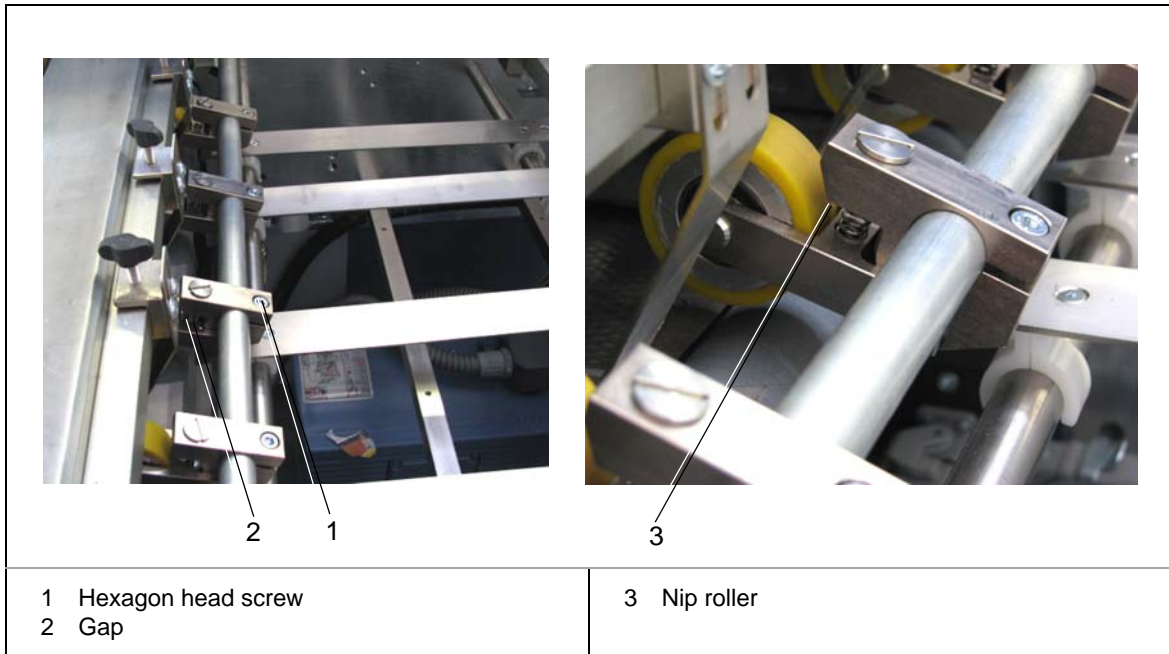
Adjust the nip rollers on the second infeed shaft.
